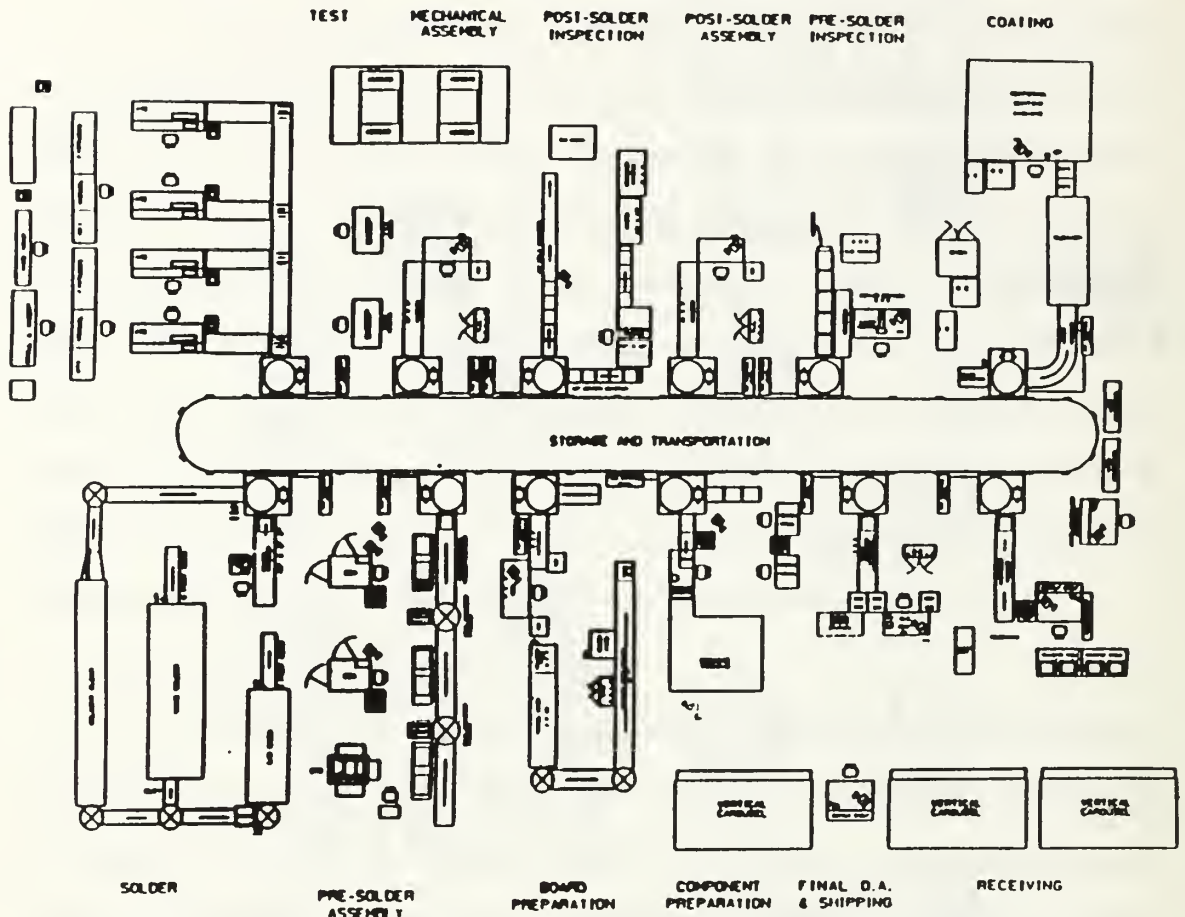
Floor Plan for the RAMP PWA Manufacturing Cell
